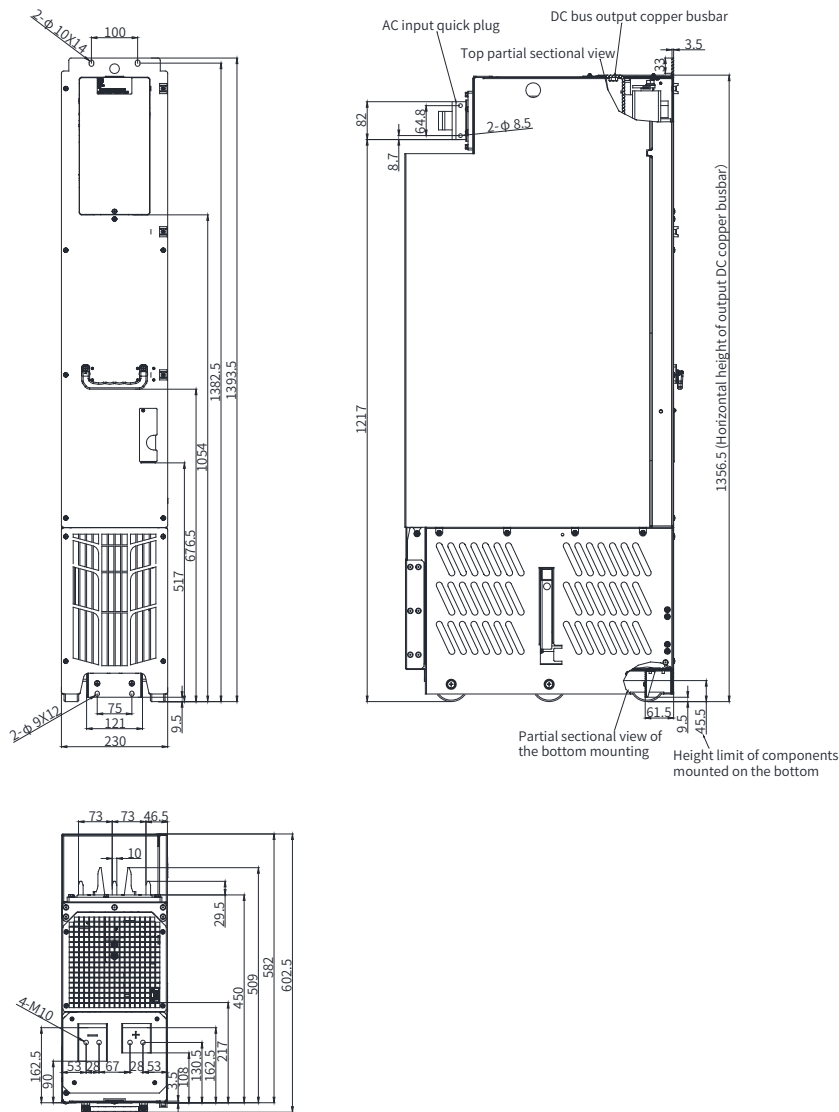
Outline dimensions of the basic rectifier module (unit: mm)
